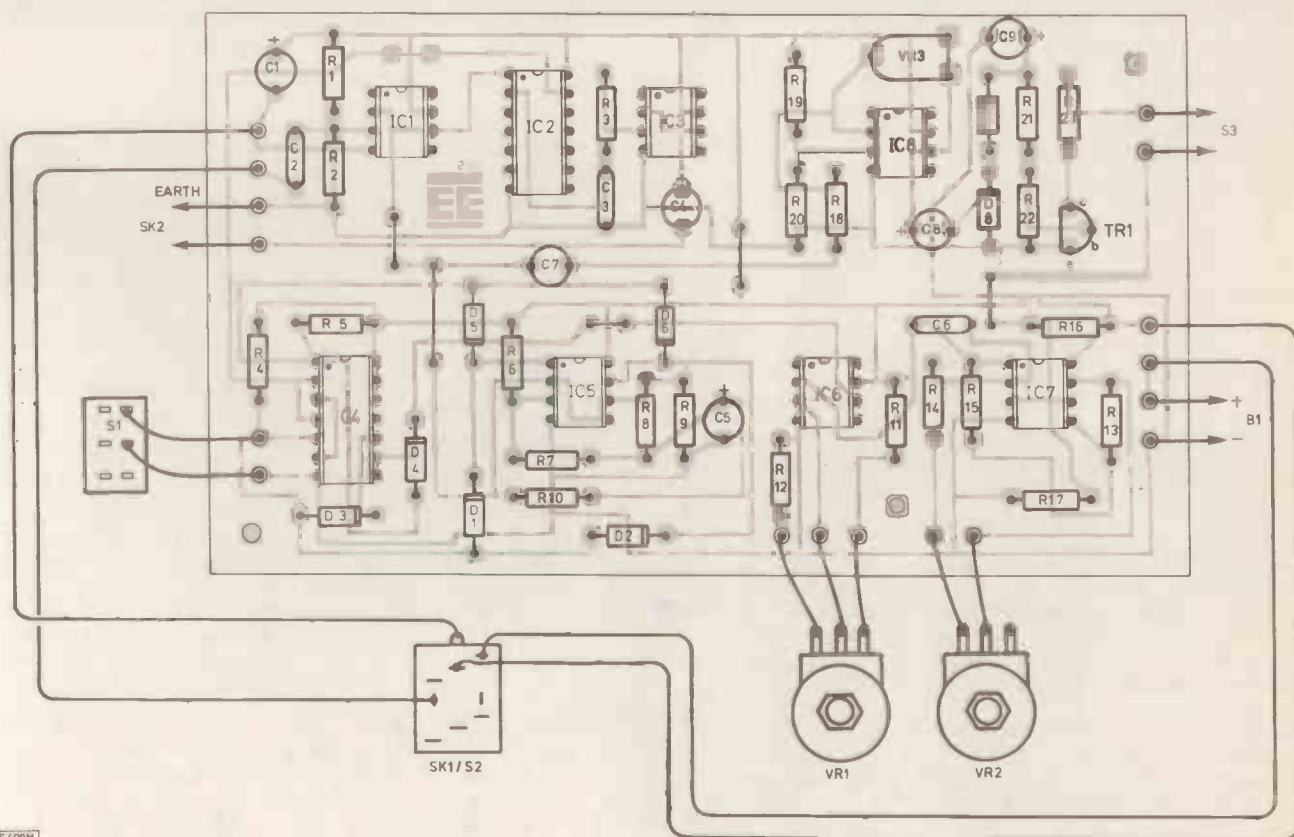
Printed circuit board component layout and interwiring details for the case mounted components.
